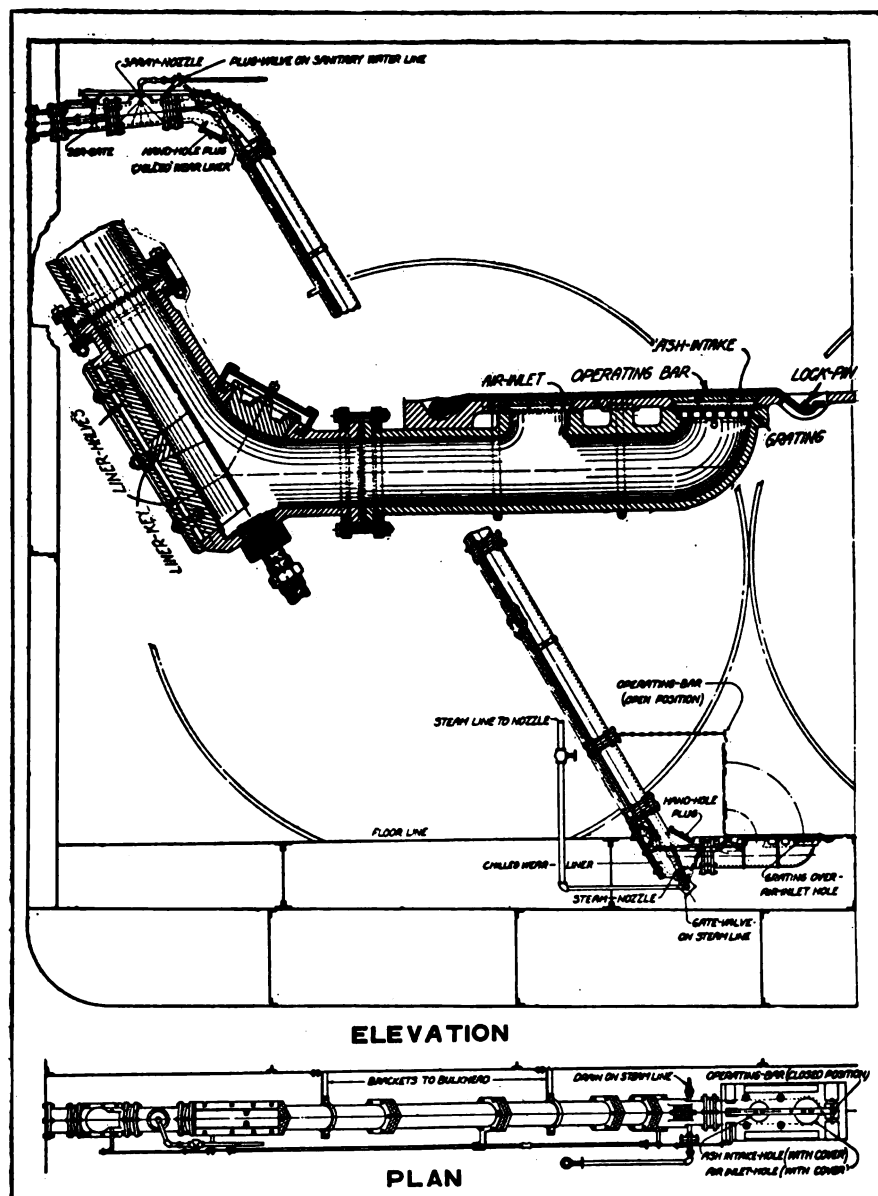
GENERAL ARRANGEMENT, ELEVATION AND PLAN SHOWING INSTALLATION OF ASH EJECTOR ON BOARD SHIP. FIG. 2 (INSERT)—SECTIONAL VIEW OF INTAKE END AND LOWER ELBOW OF ASH EJECTOR
